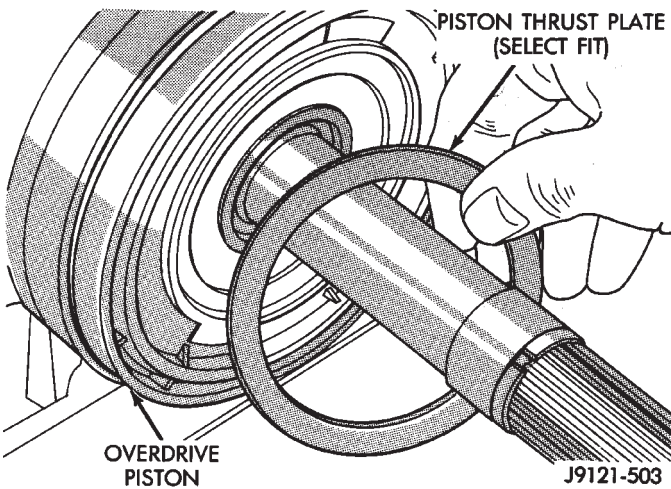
Removing Overdrive Piston Thrust Plate—46RH
